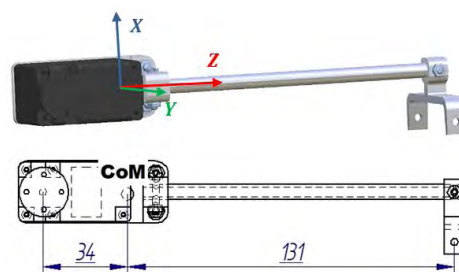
CoM and dimensions (in mm) of the shoulder roll structure.
